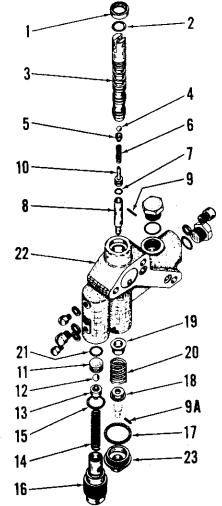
Exploded view of the double acting auxiliary control valve used on Series 354, 364, 384, 424, 444, 2424, 2444 and late Series B-414 tractors.
